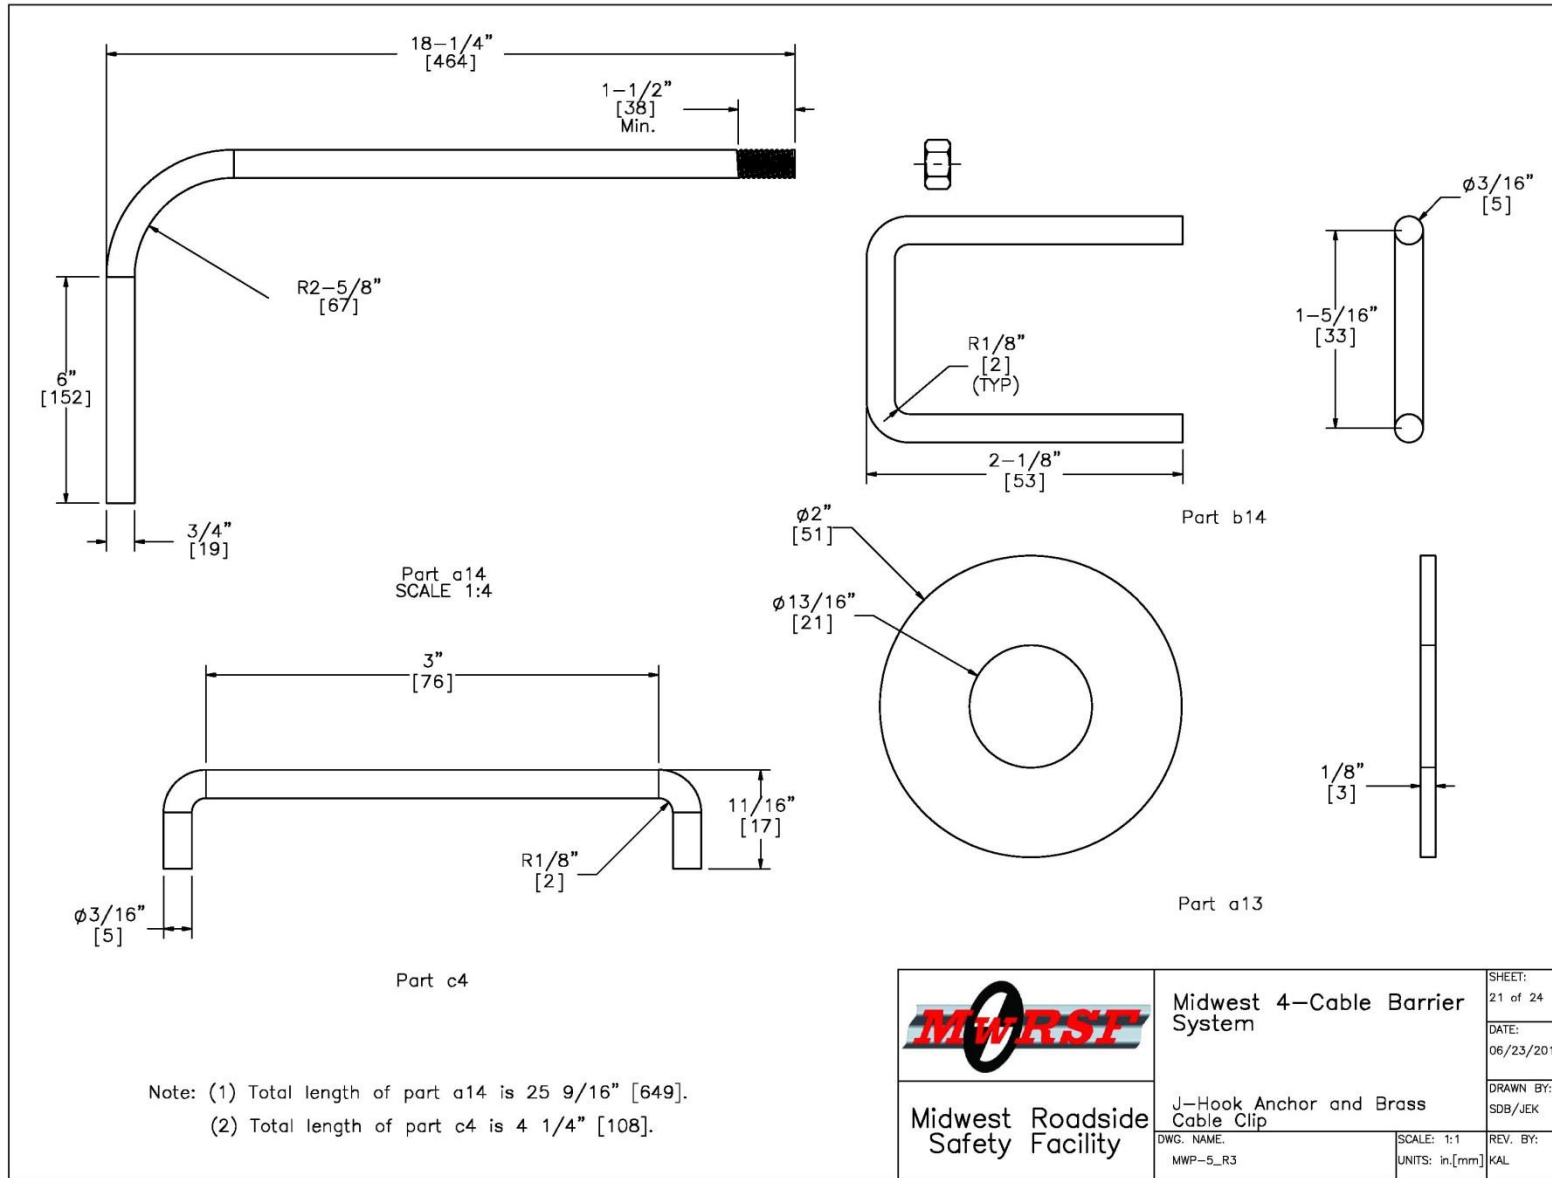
J-Hook Anchor and Brass Clips, Test No. MWP-6
